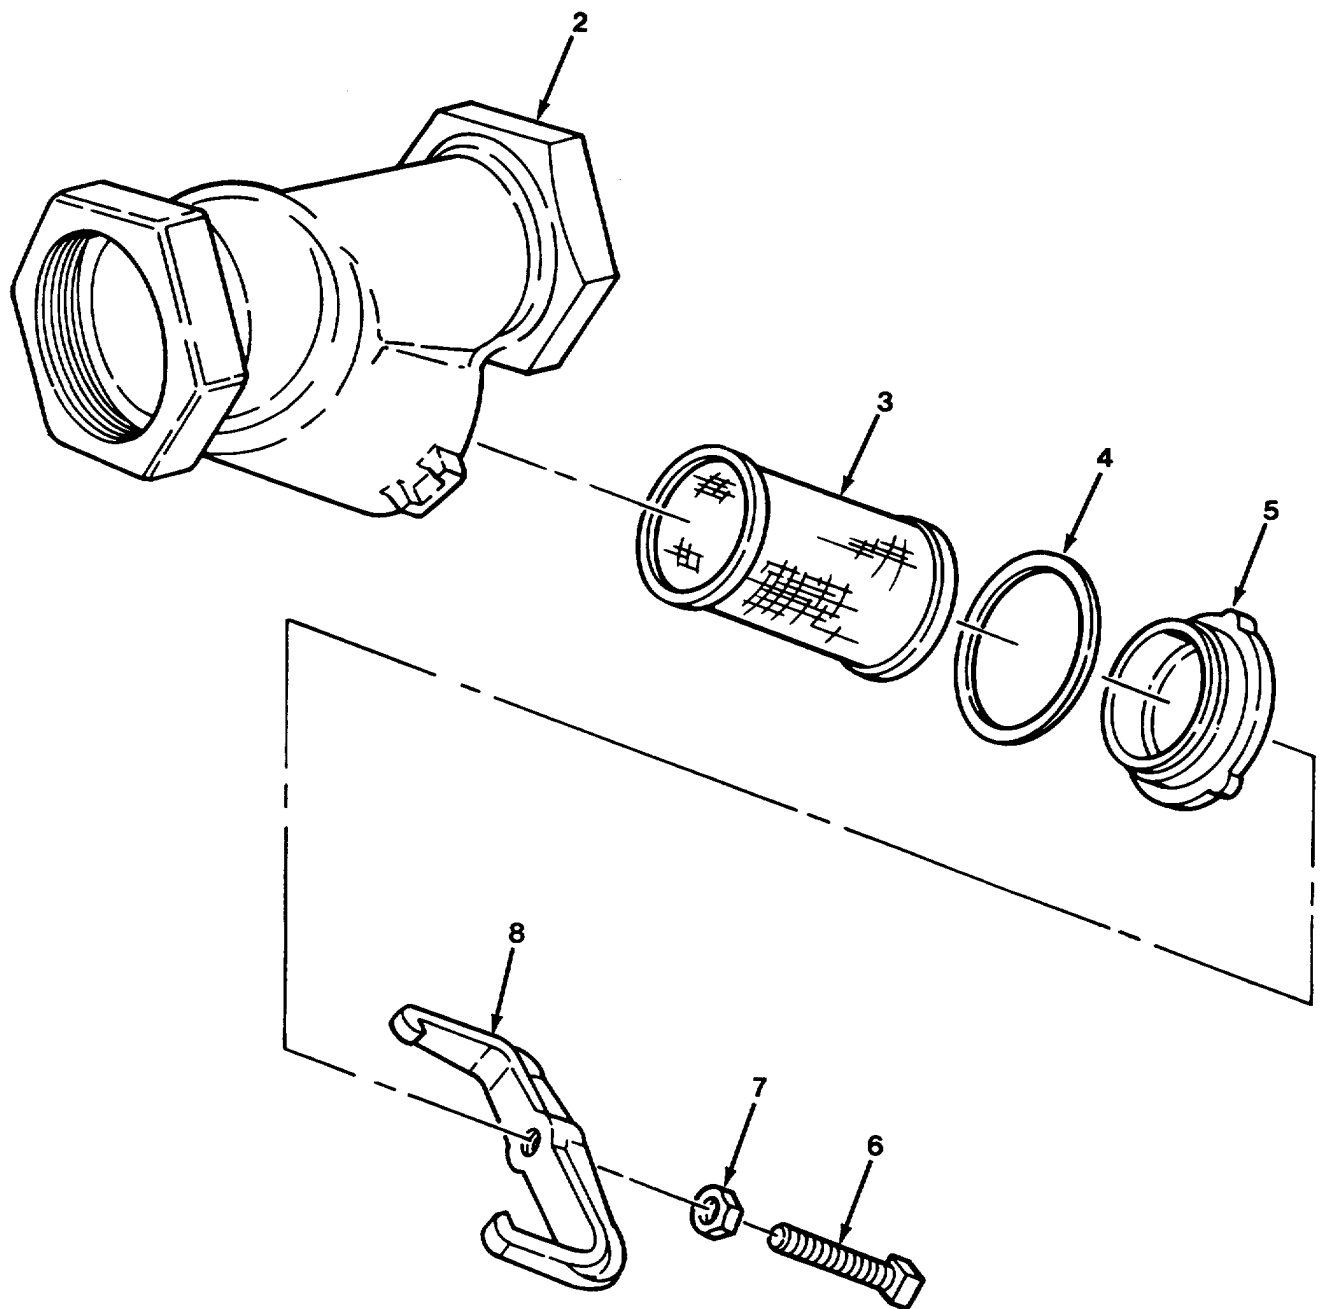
THREE INCH VALVE STRAIN ASSEMBLY
